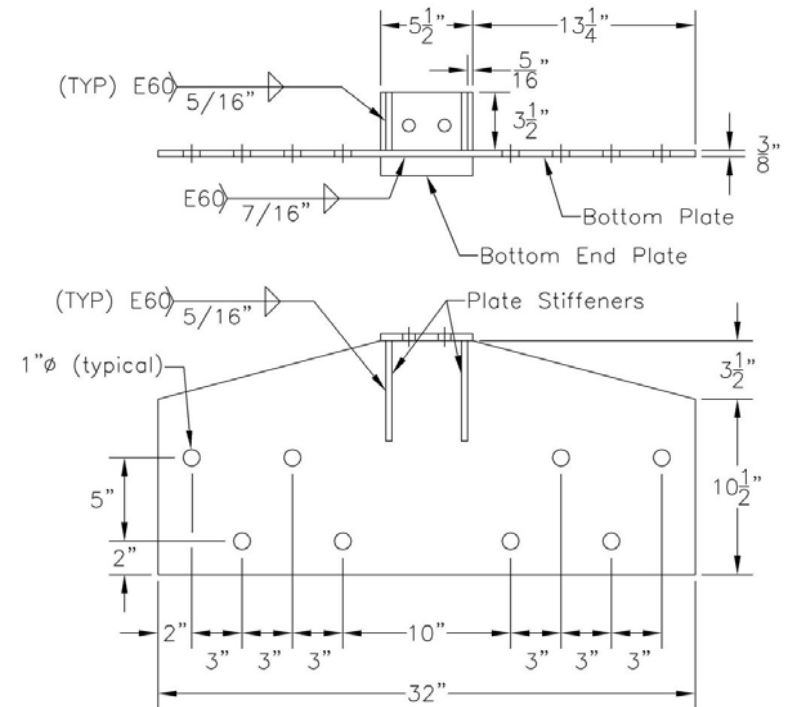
Cap Rail Splice Plate and Connection Angle Details
